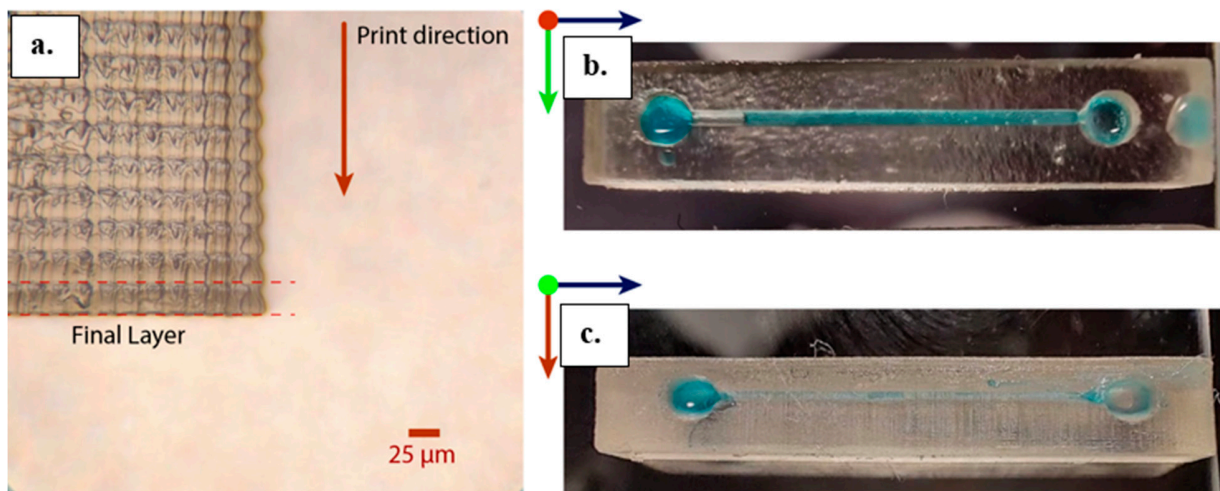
a) microscope image of side view of a printed part edge. A straight embedded channel printed with print direction b) parallel to the x-y plane, c) normal to the x-y plane
